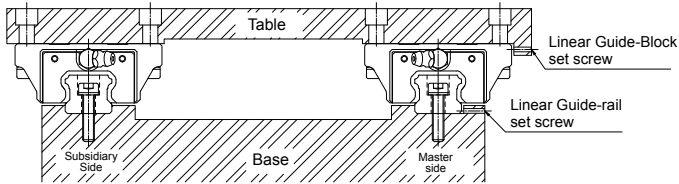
Mounting the Linear Guide on a Machine Susceptible to Vibration and Impact
